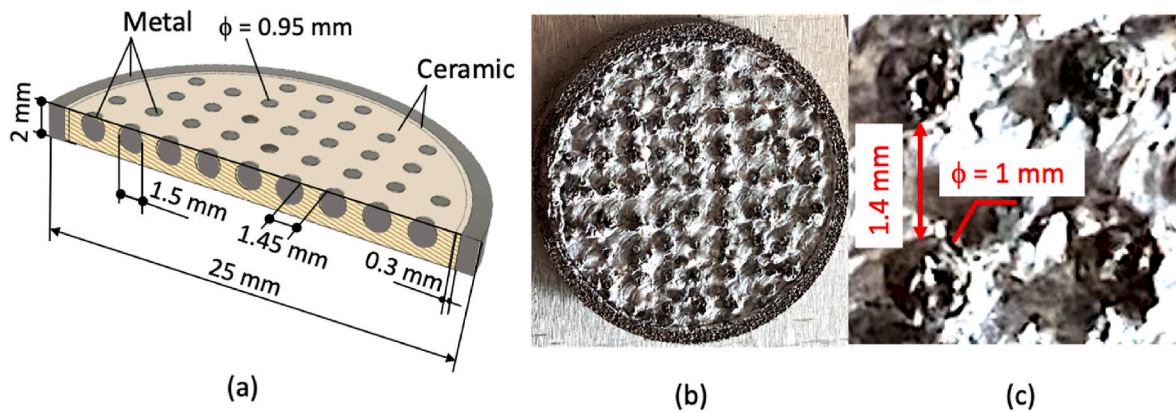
Schematic section of the fabricated bi-material part (a), view of the real part in a direction perpendicular to the manufacturing plane (b), detail of the surface of the real part (c).
